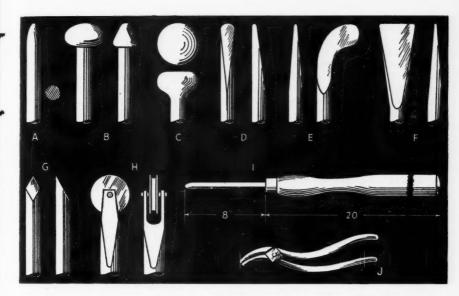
Hand-spinning Tools. A. Round Nosed; B. Raising-up Tool; C. Knob Raisers; D. Turningover Tool; E. Groover; F. Planishing Tool; G. Trimming Tool; H. Beading Wheel; I. Dimensions of Average Spinning Tool; J. Spinners' Pliers.
